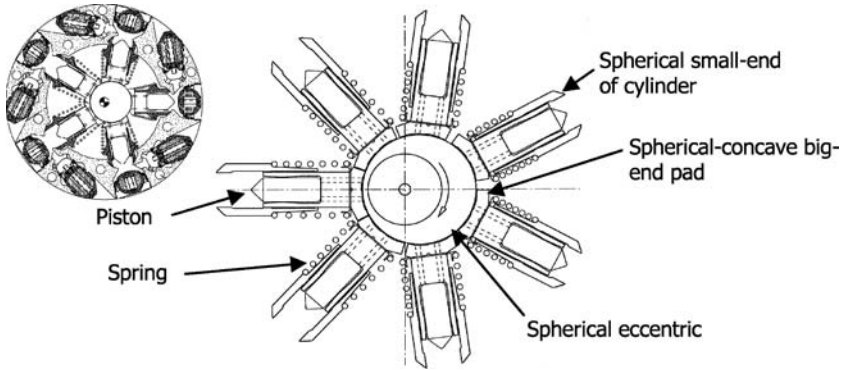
Radial-piston geometry used for high-speed active-valve machines (adapted from Salter and Rampen, 1993)
